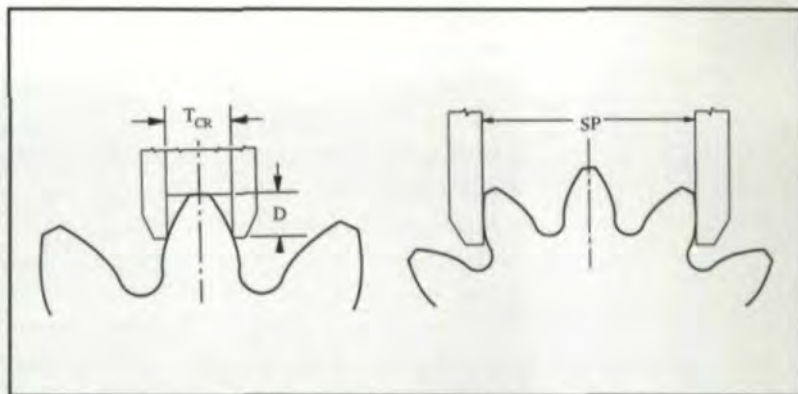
Tooth calipers. Courtesy of Van Gerpen and Reece Engineering.
